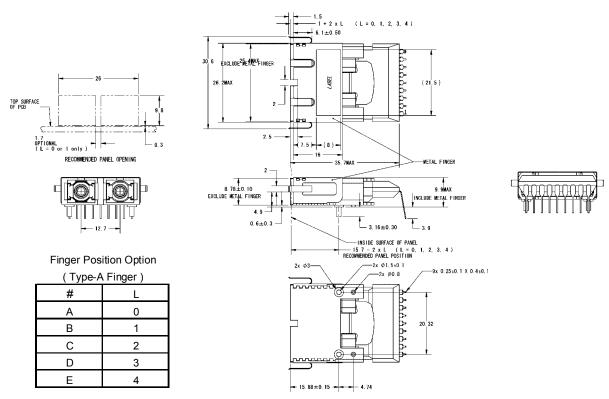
Outline Dimensions (SDM7111-GC-#N)
